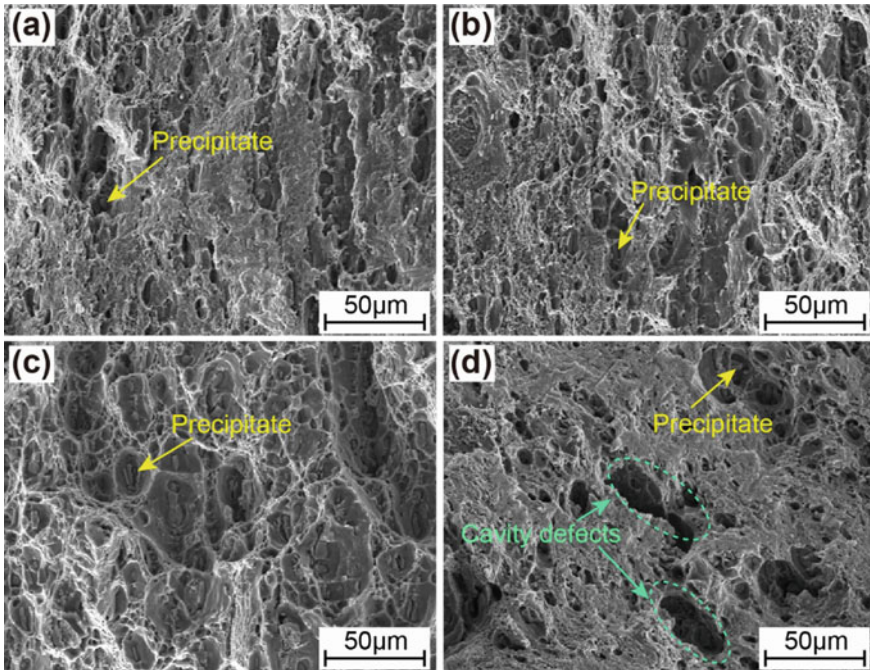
Fracture morphologies of joints 6 mm thick 2219-T6 Al alloys: a 66.7 mm/min, b 100 mm/min, c 300 mm/min, and d 400 mm/min
